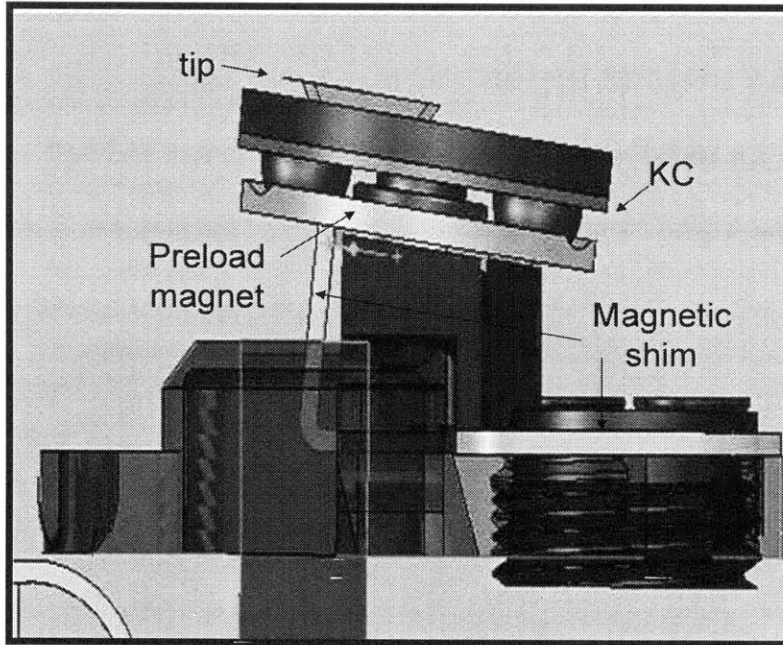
Side view of fixture CAD model, showing the ball and groove sides, preload magnet, and magnetic shim on universal mount
